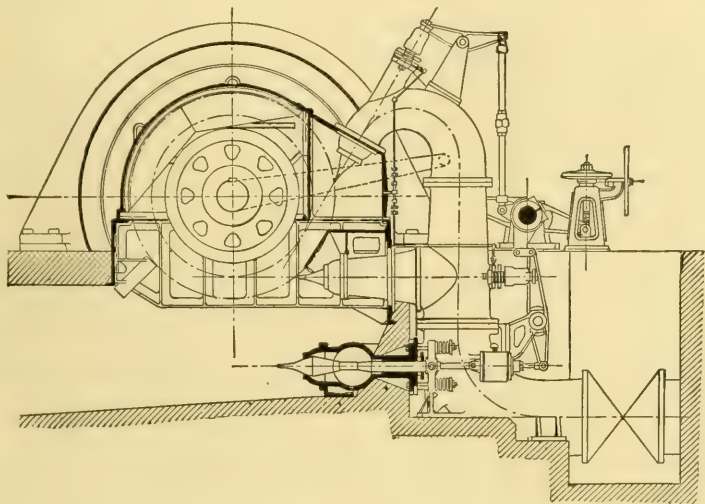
Impulse Turbine with Two Nozzles per Wheel. Arranged with Auxiliary Relief.
